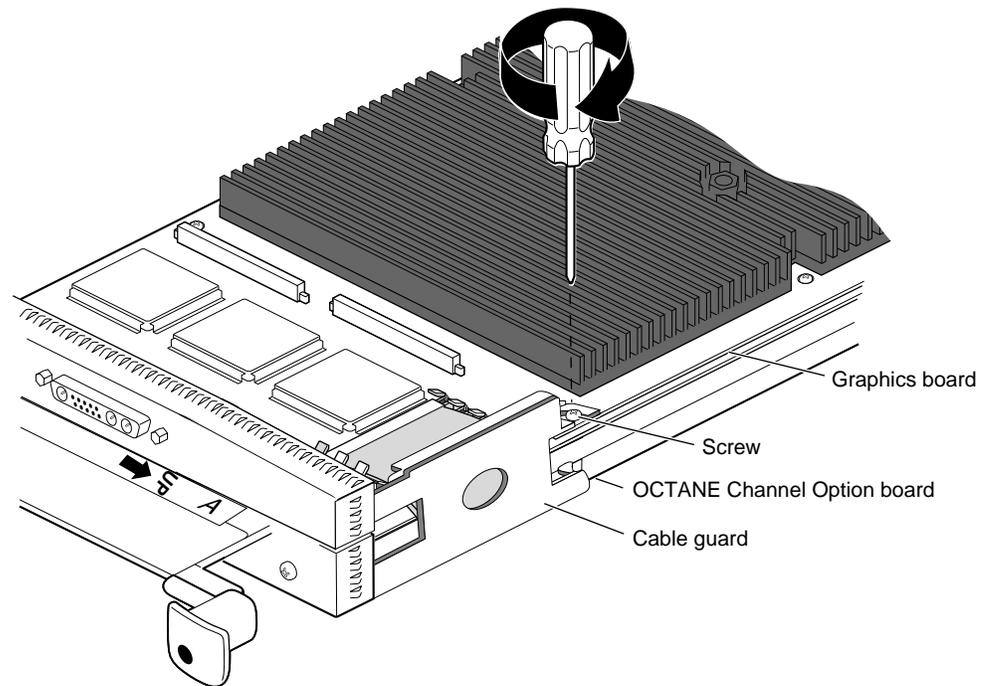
Sliding the Cable Guard Under the I/O Panels
